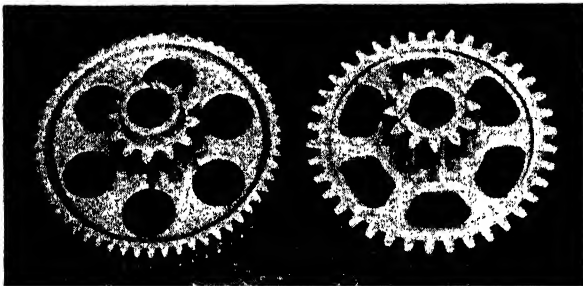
These permanent-mold gears, employed in a well-known make of domestic stoker, are cast from aluminum bronze and so close to size that the trim or shaving die, used for finishing the teeth, is said to remove only 0.0005 to 0.0015 in. of metal.
